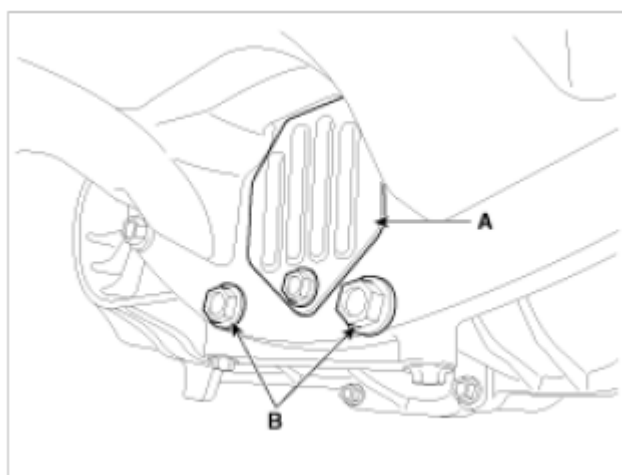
Identifying Dust Cover And Transaxle Mounting Bolts
